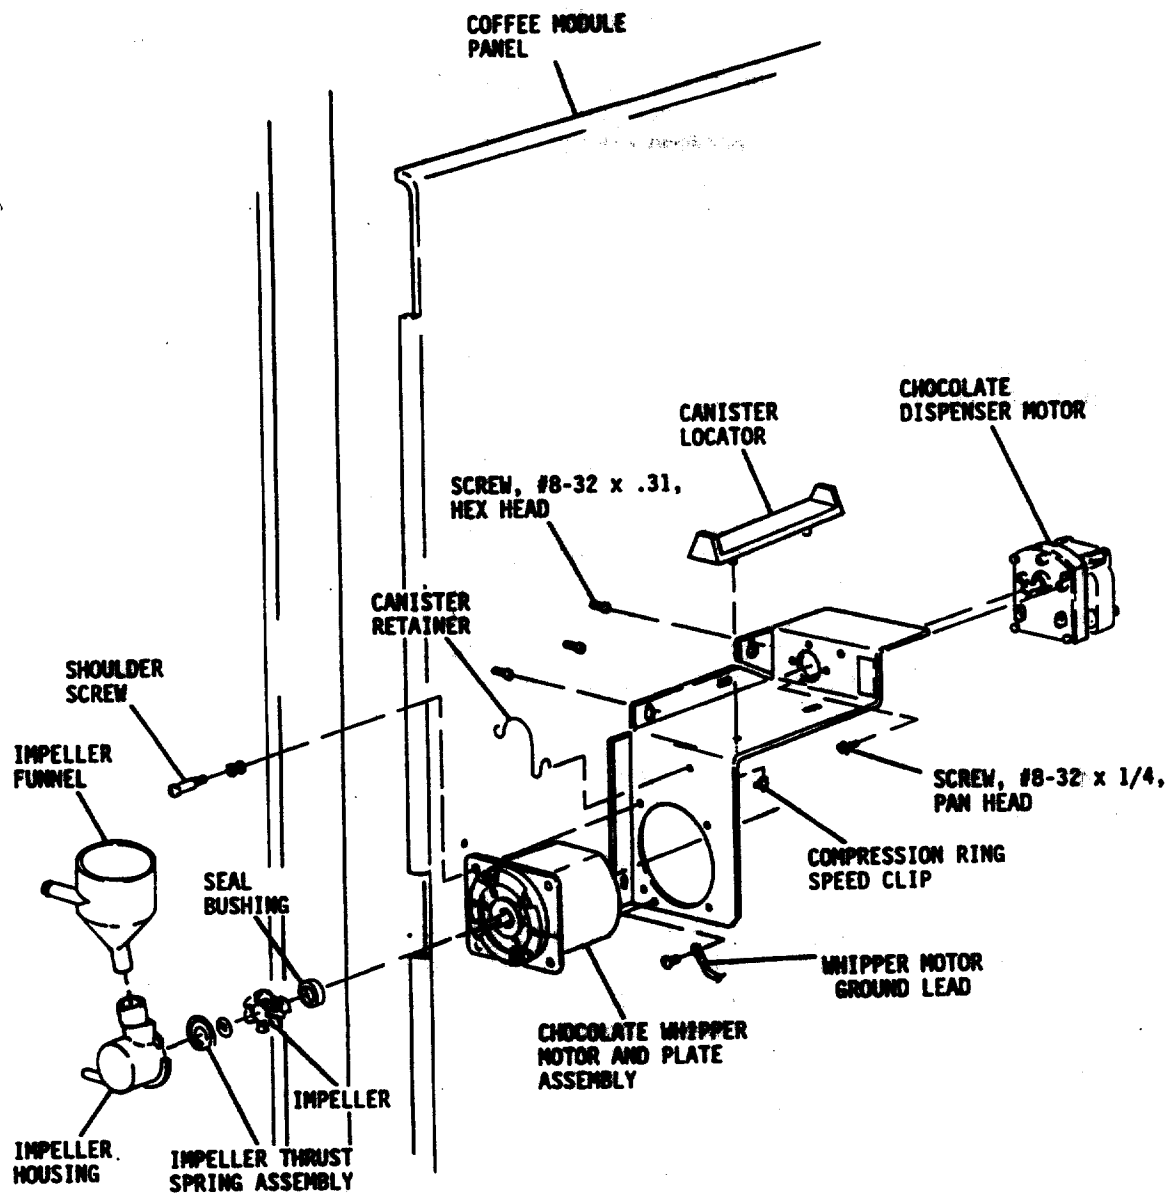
Assembly of Hot Chocolate Shelf Module
